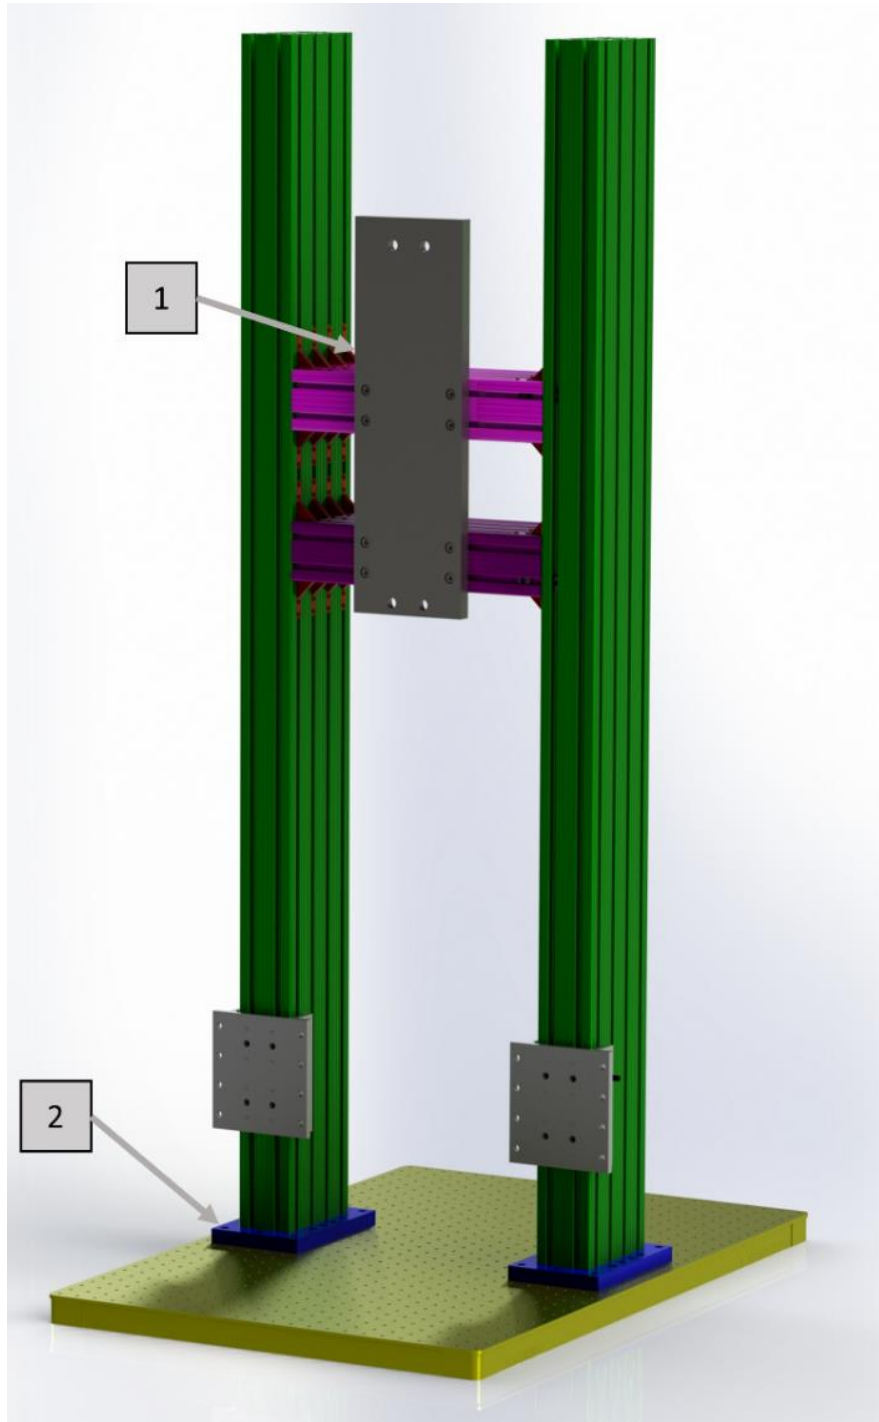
Isometric Solidworks view of the RTS frame with Thorlabs breadboard and 1) custom mounting plate for linear actuator, 2) custom mounting plates for 80/20 profile to breadboard
